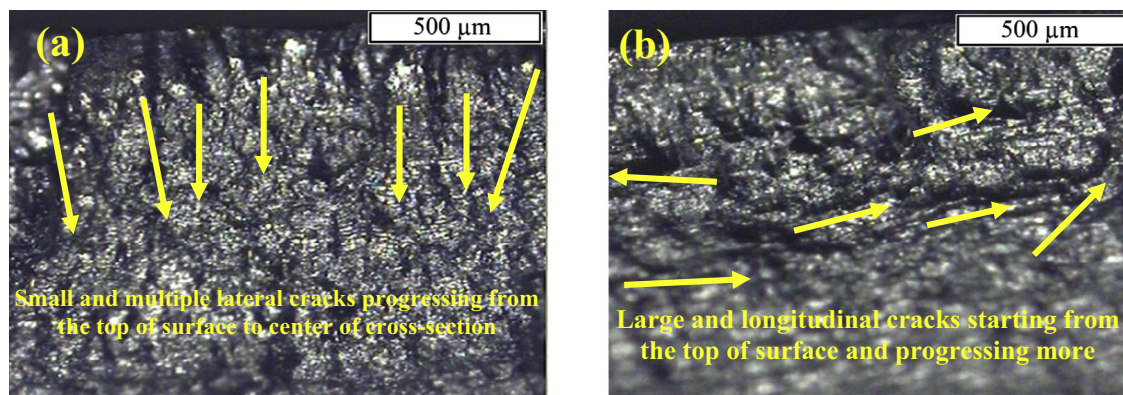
Macro cracks progressing on the top of the surface of the AA1100 (T) specimen.
